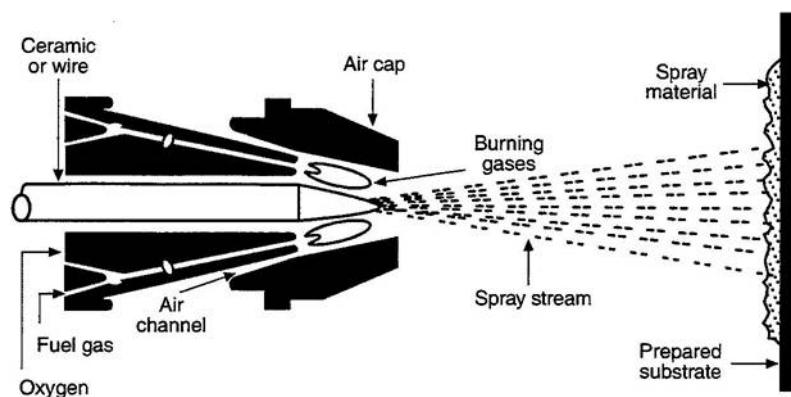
Cross-Section of Typical Wire or Rod Flame Spray Gun
